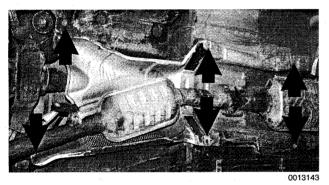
After removing exhaust system, remove heat shield screws (arrows) and heat shield.
